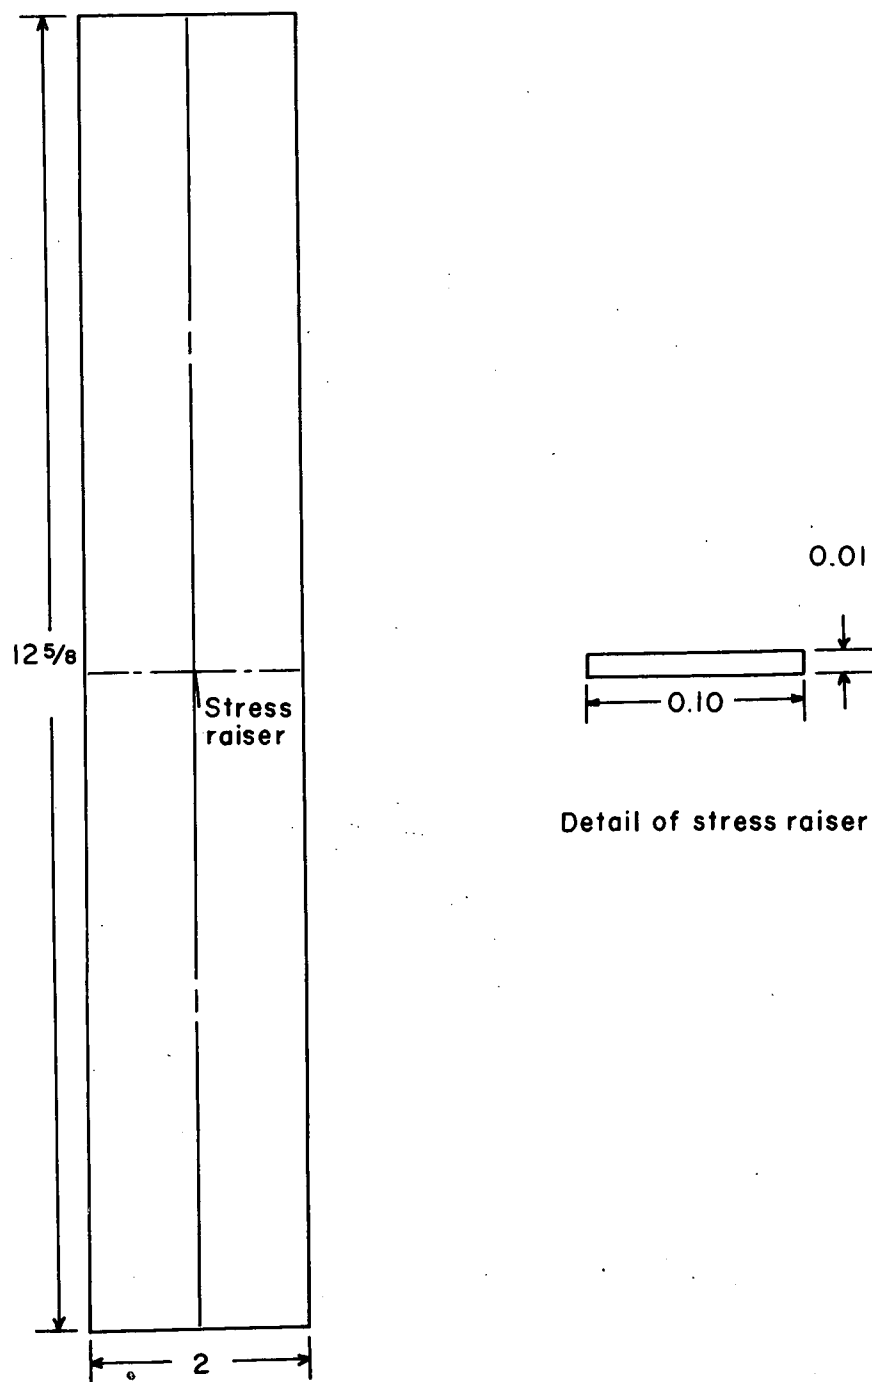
Configuration of fatigue-crack propagation and fracture-toughness specimens. All dimensions are in inches.
